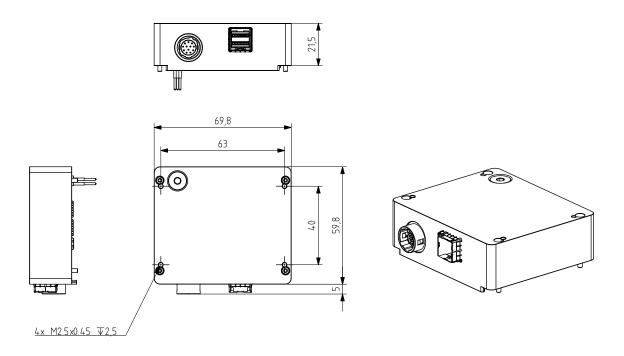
ADPT-MX-X4G3-FF-X4G3-SFF dimensional drawing
